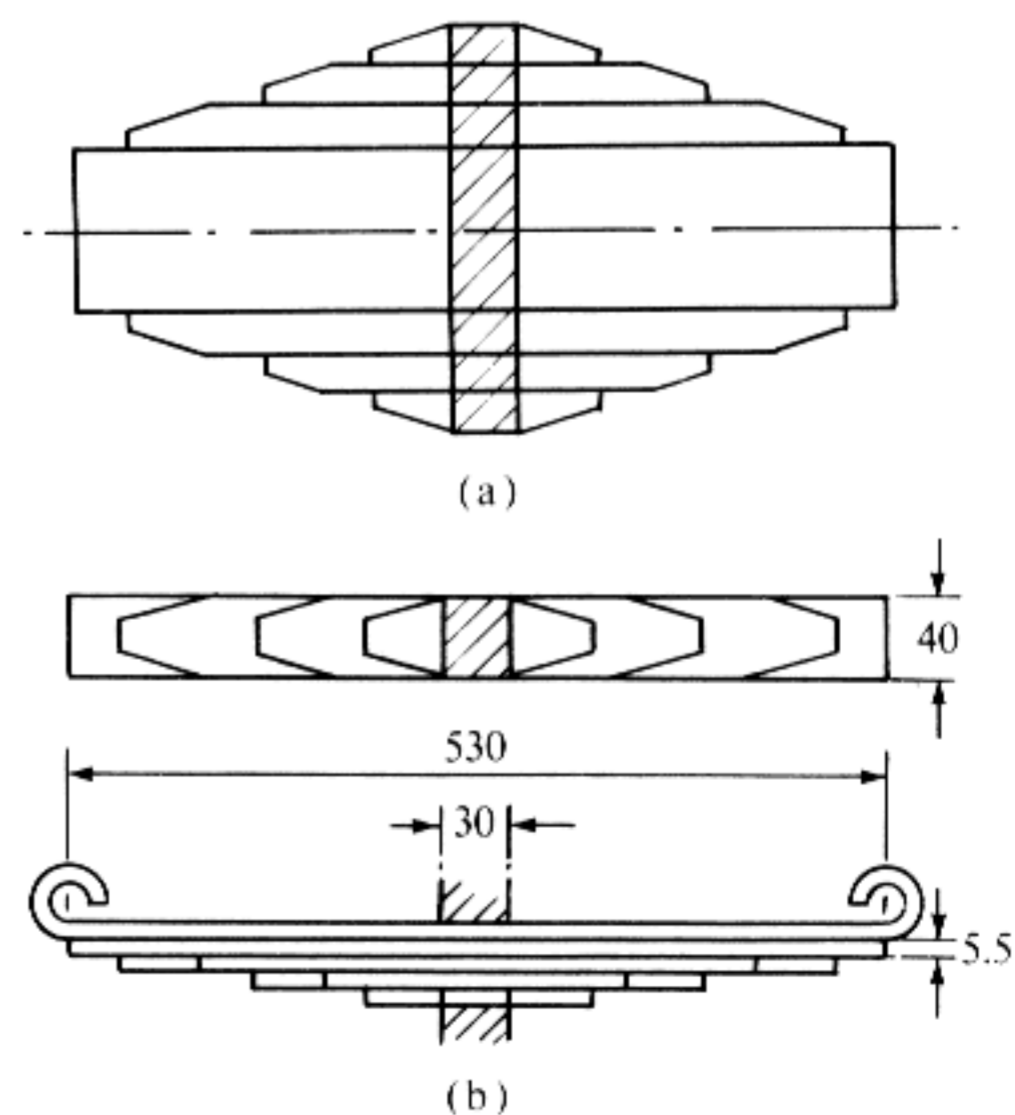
Solution to worked example on trapezoidal spring (all dimensions in mm)
